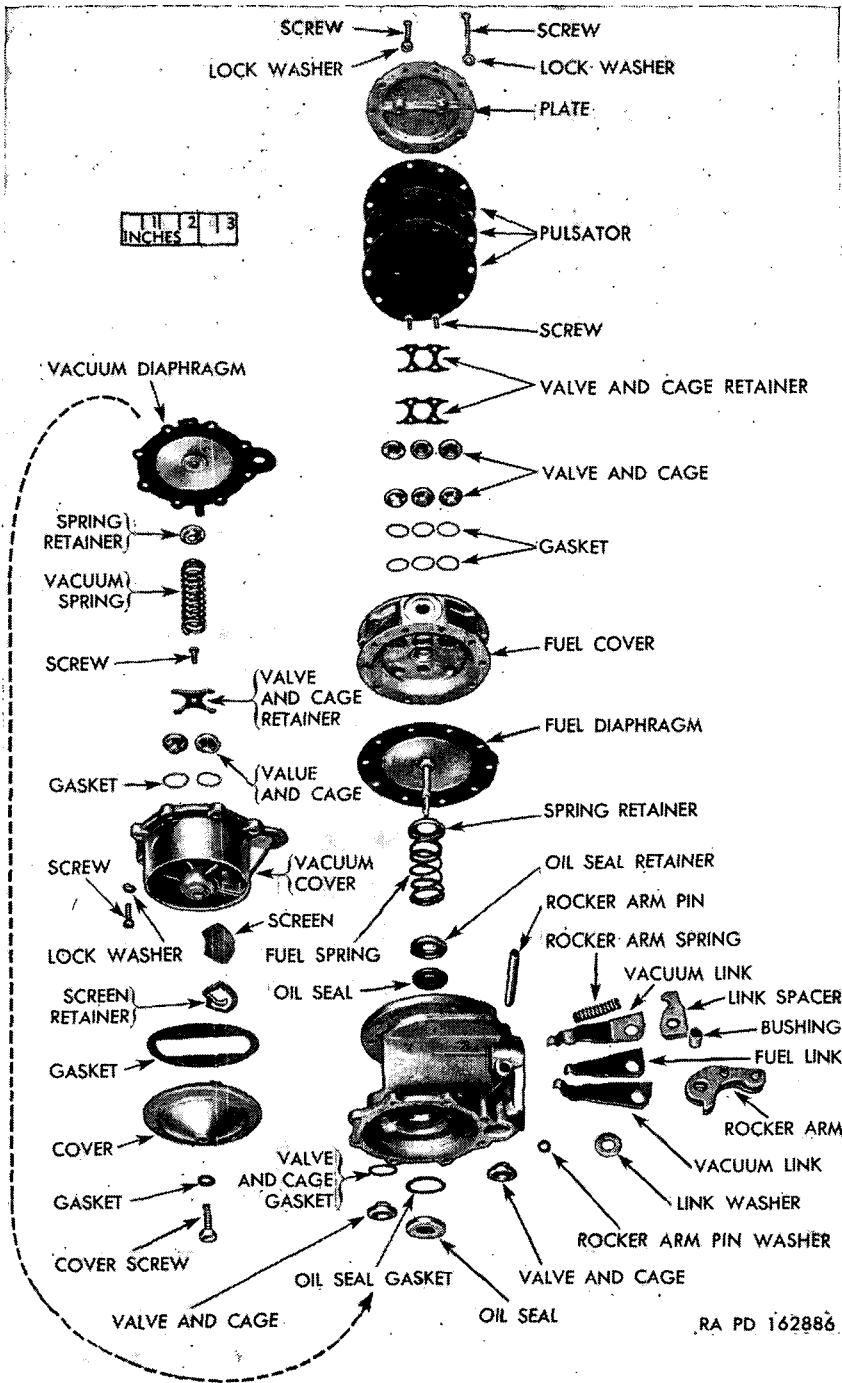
Fuel and vacuum pump, disassembled view (typical series CU and CY construction).
